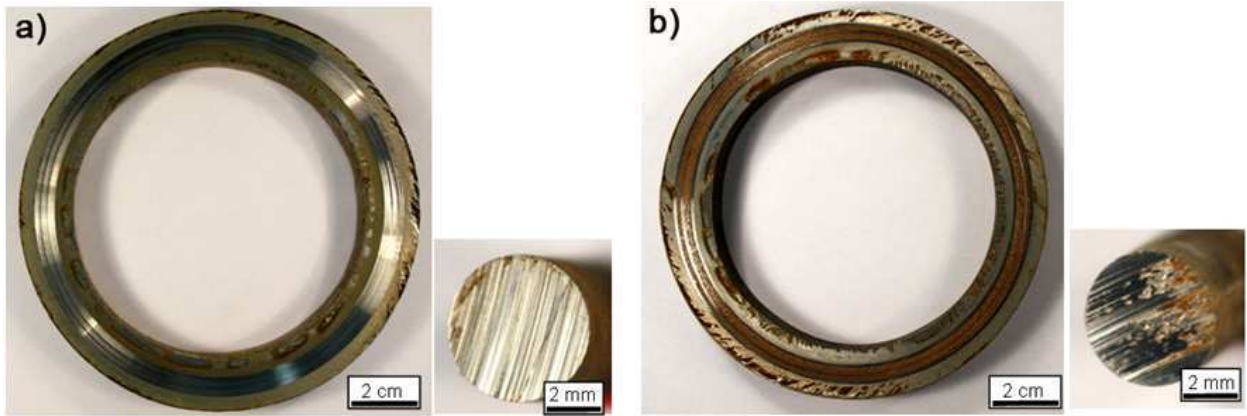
Pin and disc samples after tribotest: a) disc sample worn with hard pin material; b) disc sample worn with soft pin material with adhesive wear marks
